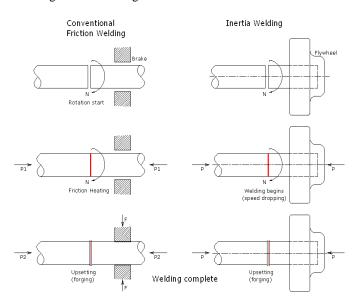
Schematic layout of conventional rotary friction welding and inertia friction welding.
